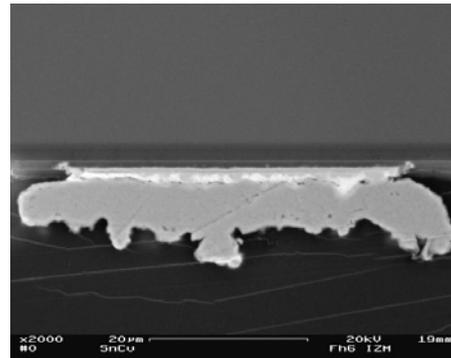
Ultra thin contact with a Cu wiring on the bottom a thin layer of solder/intermetallic and a top Ni contact.
